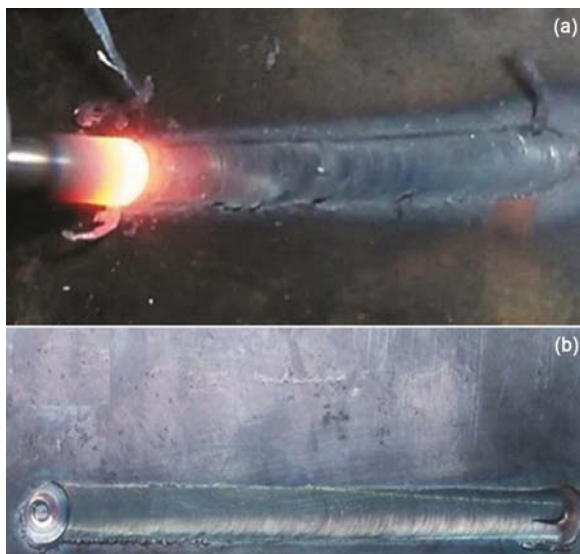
Friction stir processing of (a) Steel sample and (b) FSPed sample.
